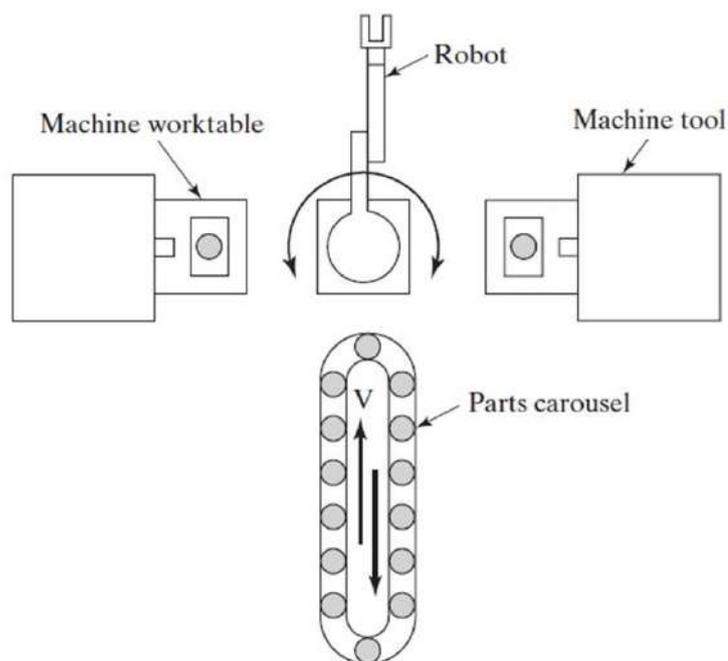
Automated manufacturing cell with two machine tools and robot.
